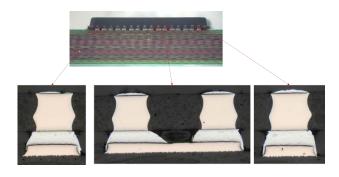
Cross-section of SAC305 soldered QFN64 package (9x9 mm) without solder fillet (EMC = 12 ppm/°C)
